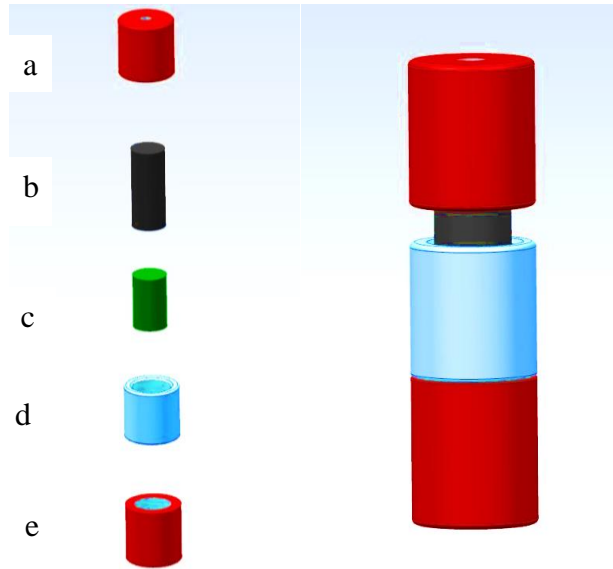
Schematic of the die set used for pellets sintering in parts (left) and assembled (right) (a) and (e) top and bottom steel sleeve (b) and (c) pushing rods, (d) opened steel cylinder.
